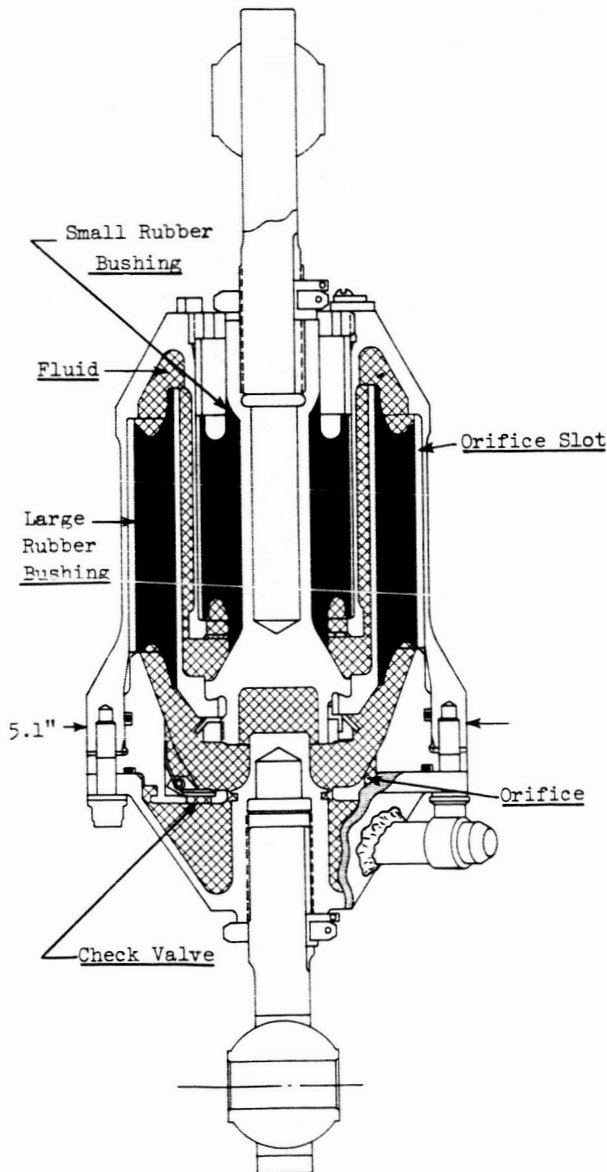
Stall-Flutter Spring-Damper Pushrod Assembly.
